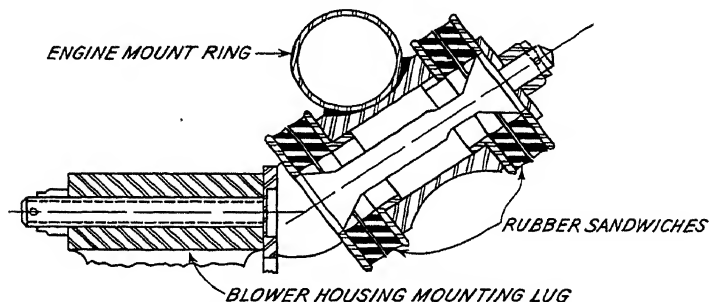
Rubber sandwich-type of vibration-isolating rubber engine-mount bushing. (Goodyear Tire & Rubber Co., Inc.)
